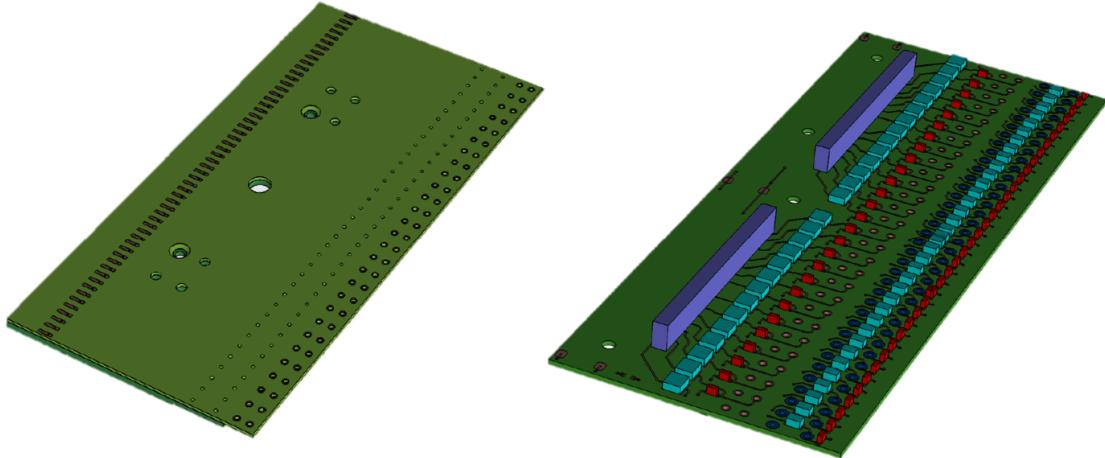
Left: Design of a wire bonding board for the X wires. The wires are glued on the leading edge of the top surface, and then soldered to the soldering pads. Right: Another board, located underneath the four wire boards, carries the RC network for the bias voltages.
